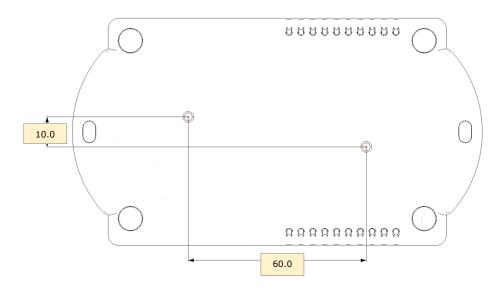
LDSBus 2CH NL Relay Dimension - Bottom View
